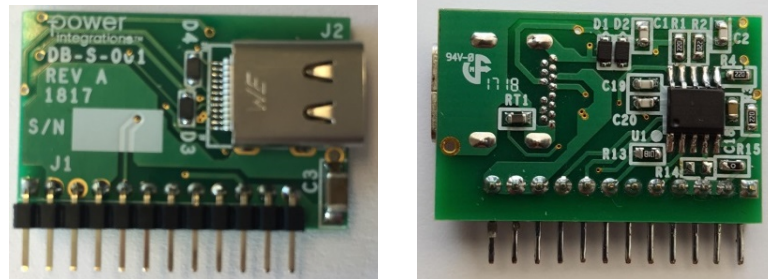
Populated Circuit Board Photograph, Daughter Board. [Front and Rear].
